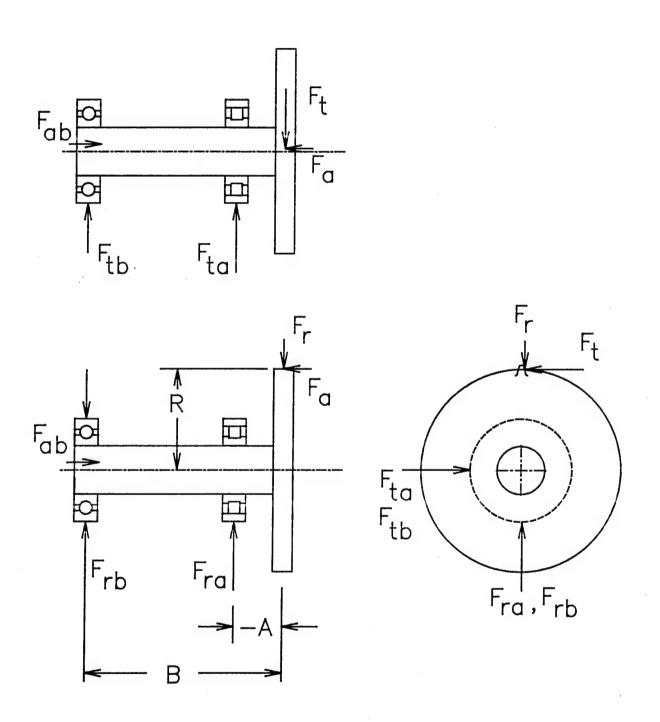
SINGLE-GEAR OVERHUNG SUPPORT LOADING
